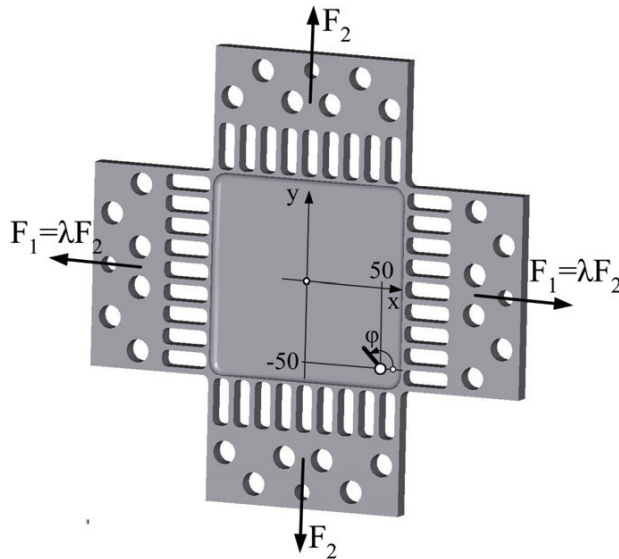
Geometry of the cruciform specimen with notches nearby the edge of the gage area
